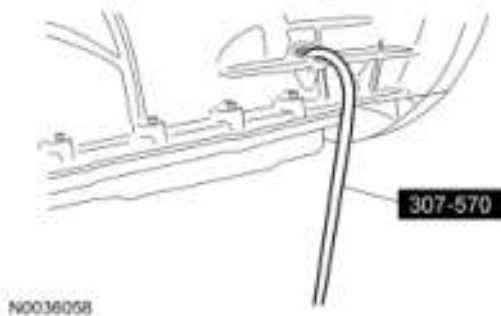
Installing Special Tool (307-570) Into Fluid Fill Hole
